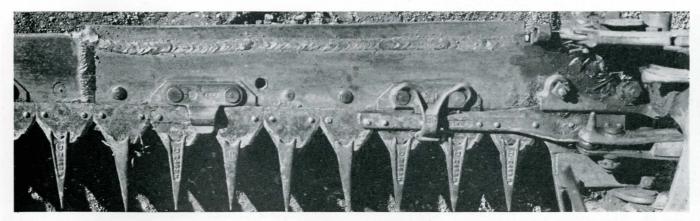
Since many horse mowers have only a 5-foot cutter bar, which is rather short for tractor use, a 2-foot extension can be welded on to make a 7-foot cut. This practice is recommended only when a good welding job can be done by an experienced welder.
